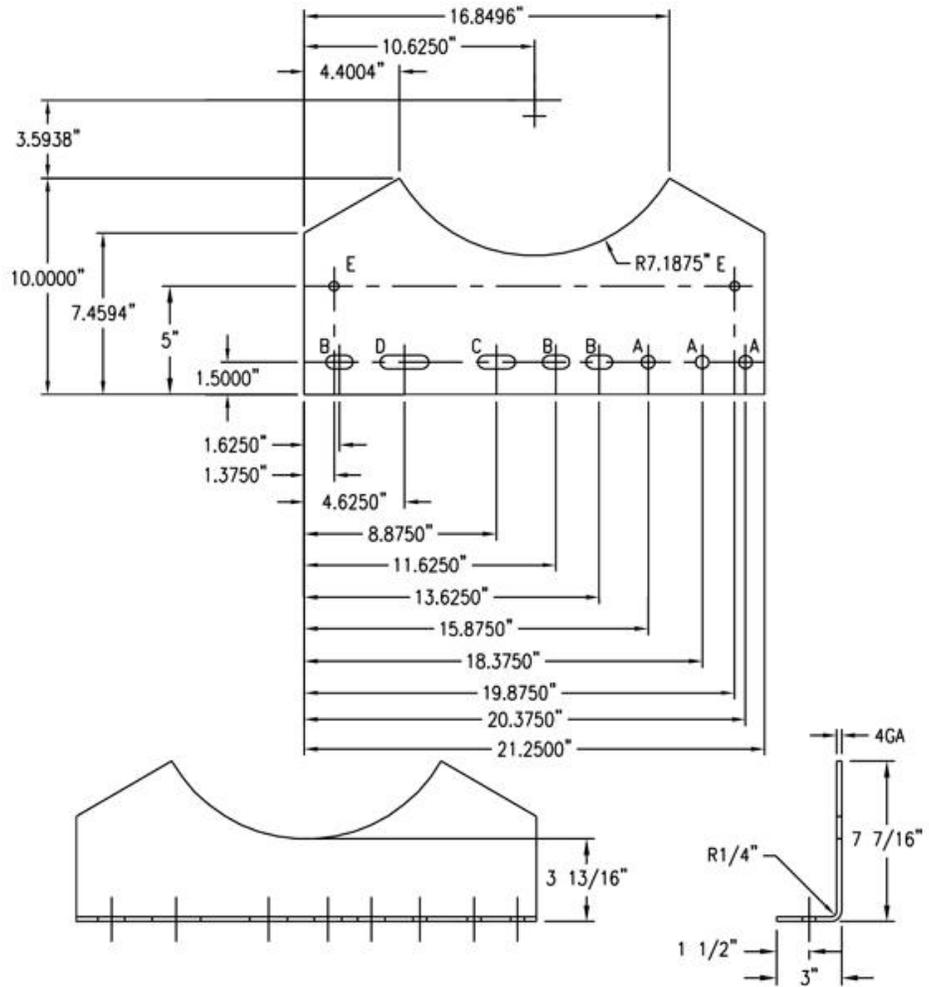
Bolt Hole Dimensions for Tank Bracket Shown in Figure 2
